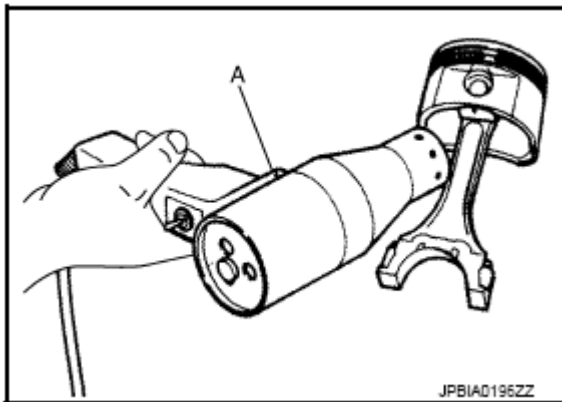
Heating Piston To 60 To 70°C Using Heat Gun
